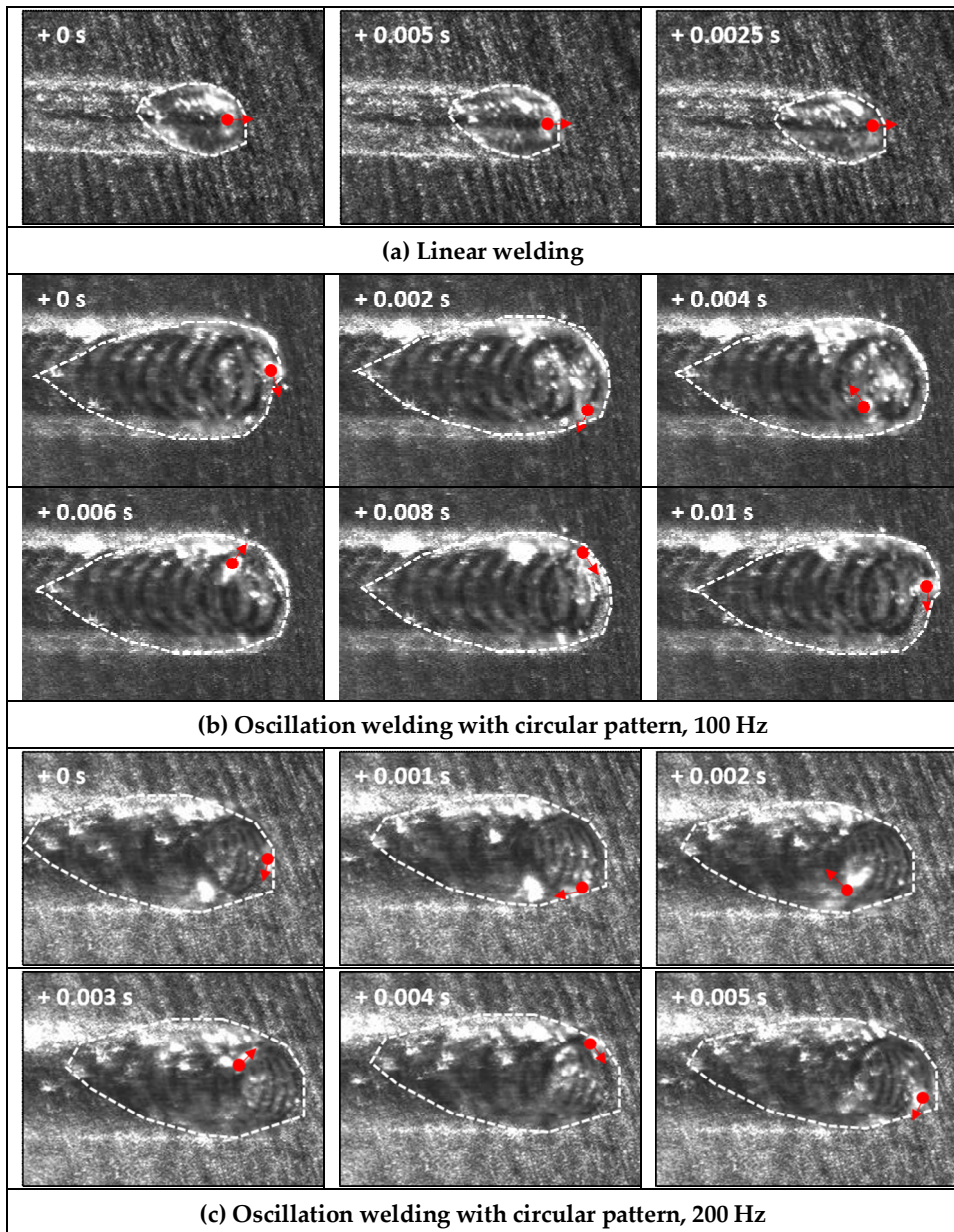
High-speed camera images of the molten pool during a single oscillation. (a) linear welding with 900 W laser power at 3 m/min welding
